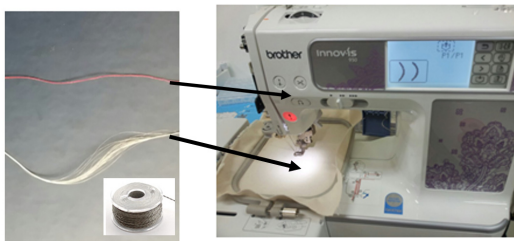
Embroidery machine with silver conductive thread and red ordinary thread in the lower and upper containers.
